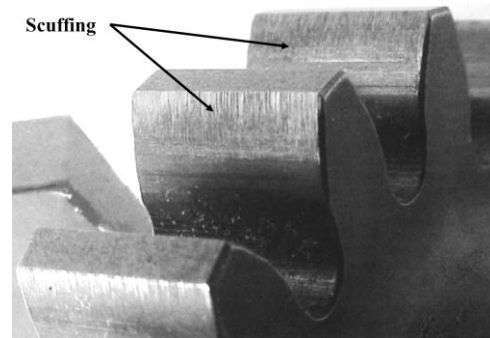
Specimen gear with scuffing failure [1,91]
